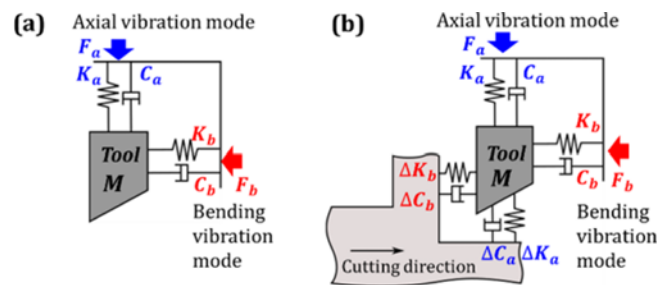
Model of elliptical vibration cutting system, (a) Not machining, (b) Machining
